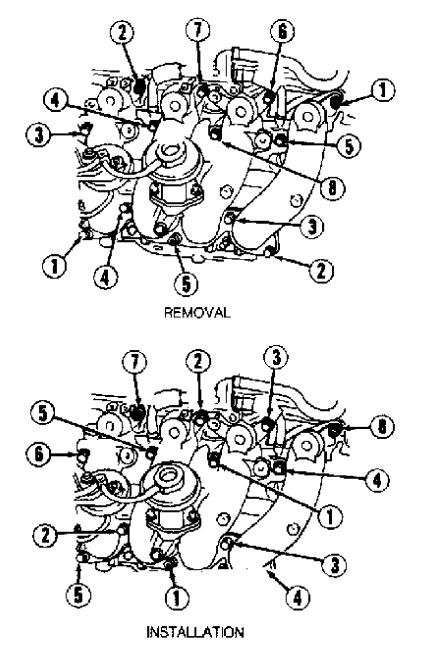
Intake Manifold & Intake Manifold Collector Bolt/Nut Removal & Installation Sequence Courtesy of Nissan Motor Co., U.S.A.
